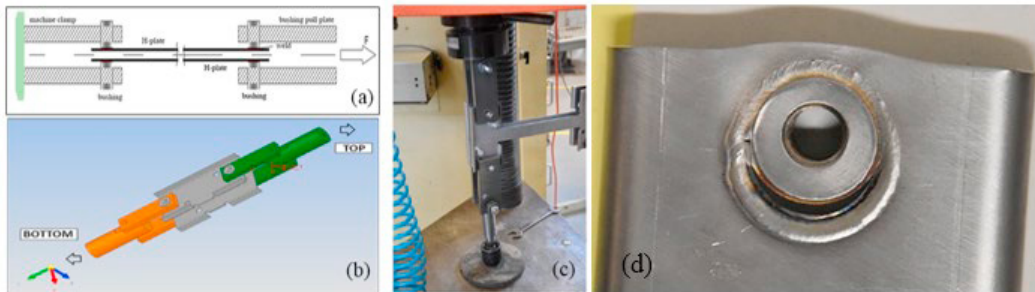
Shear test static diagram (a). 3D Static layout for shear test (b). Installation details (c). Failure detail (d).
